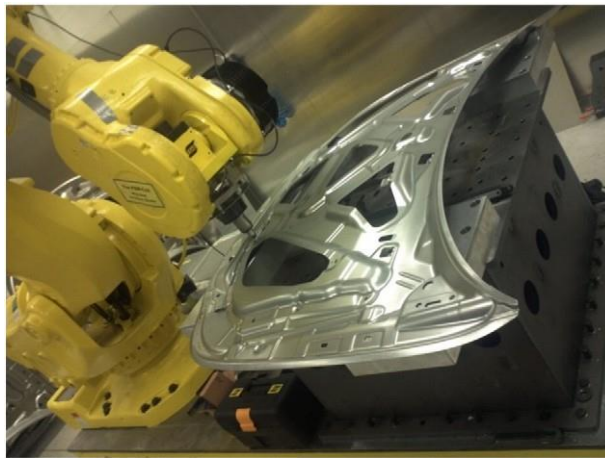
robotic FSW of a multi welding part [186].
